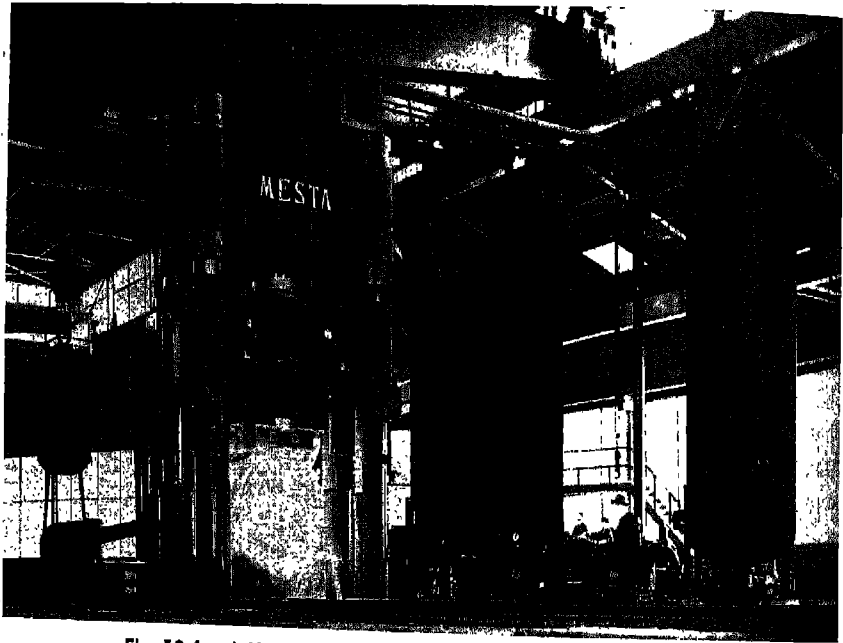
A Heavy Forging Press. (Courtesy, Mesta Machine Co.)
